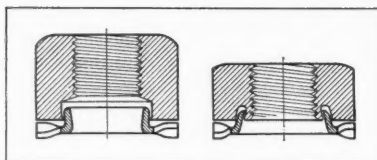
Cross-section views of "Keps" shown in Fig. 1, illustrating assembly of nuts and lock-washers
